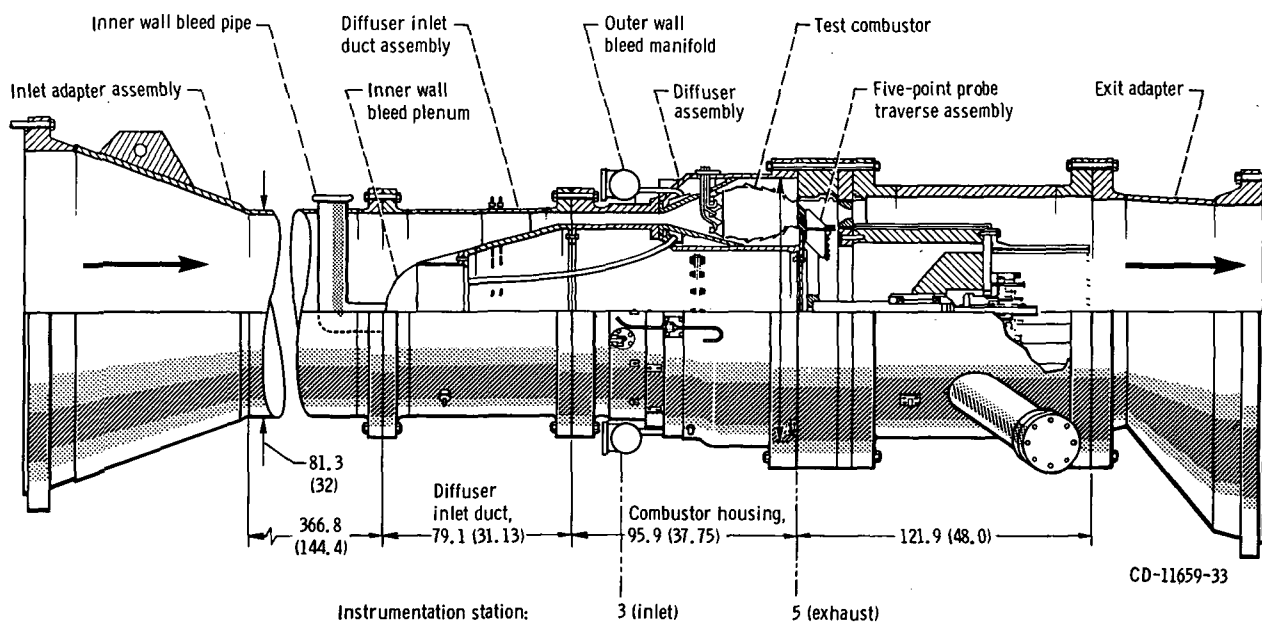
Test section for full-scale annular combustor equipped with diffuser bleed. (Dimensions are in cm (in.))
